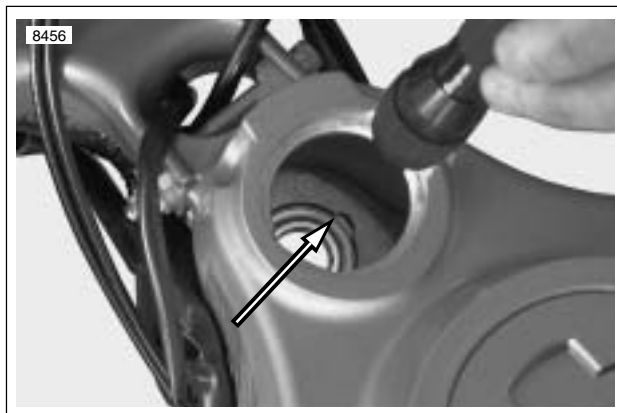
Lower Steering Head Bearing Notches (upper bearing removed for clarity)
